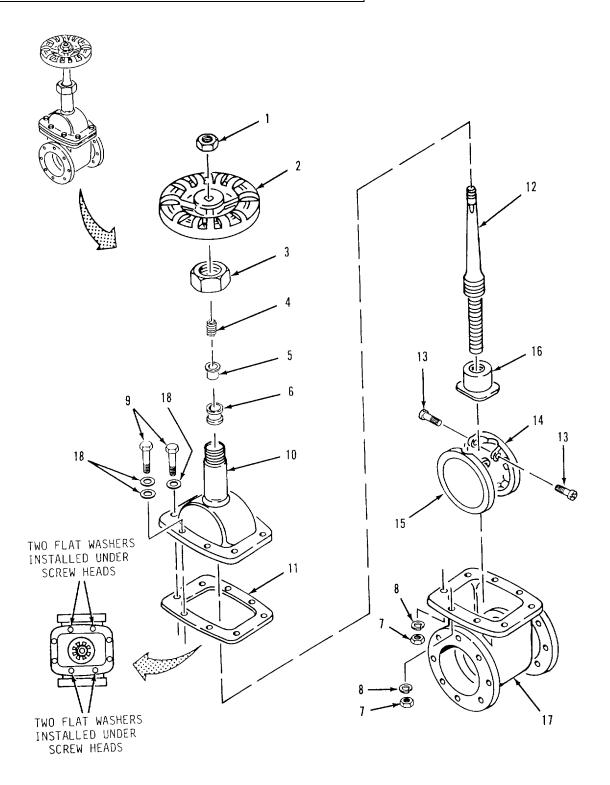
Gate Valve Assembly (4-Inch) Repair.
